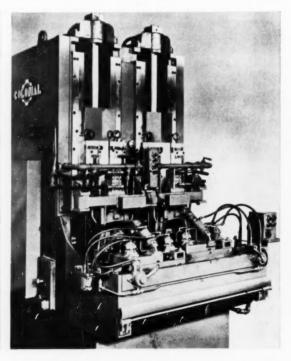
Colonial dual-ram broaching machine equipped with pneumatic hydraulic shuttle
